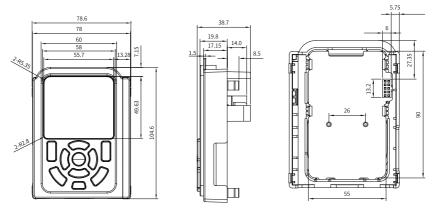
Outline and installation dimensions of LED operating panel for T1 to T4 models (mm)
